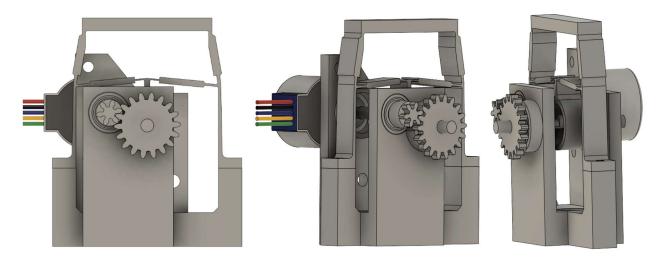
Front and side views of the JWST Mirror fine positioning mechanism as designed by Polyfractal [22]
